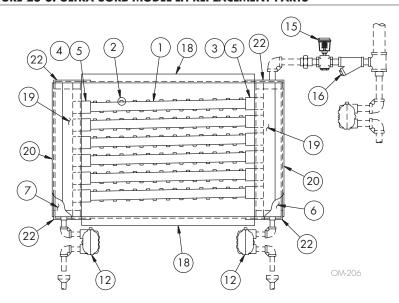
ULTRA-SORB MODEL LV REPLACEMENT PARTS
